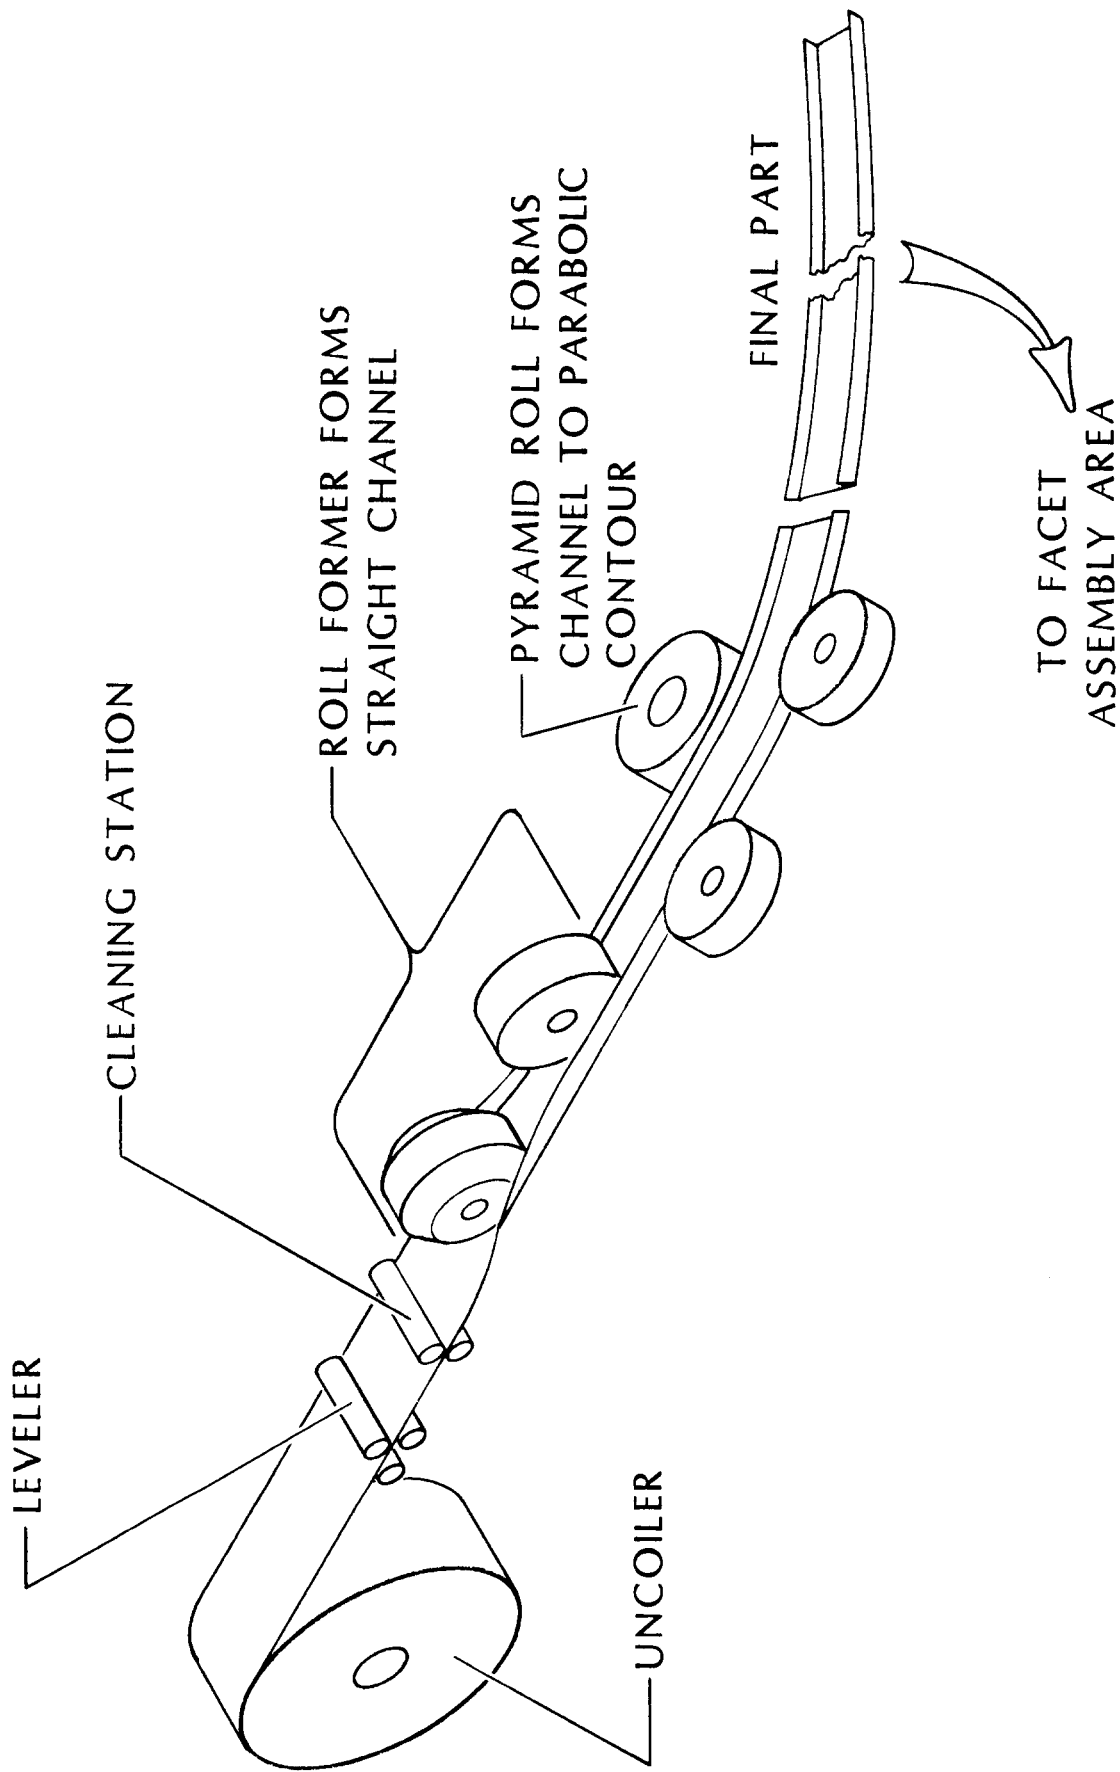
COMMERCIAL OPTICAL ASSEMBLY SIDE AND END CHANNEL PRODUCTION
